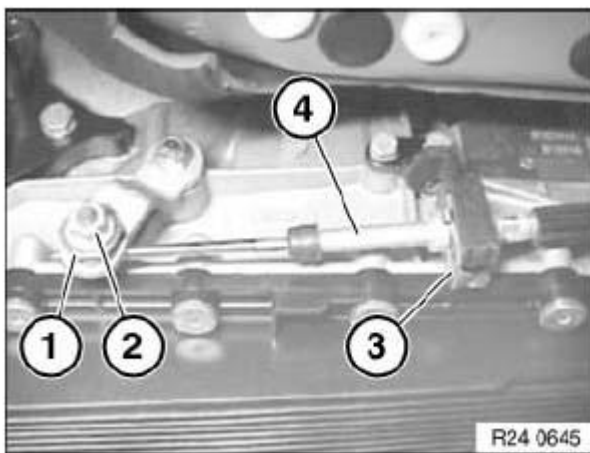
Identifying Clamping Sleeve, Retainer And Slacken Nut
